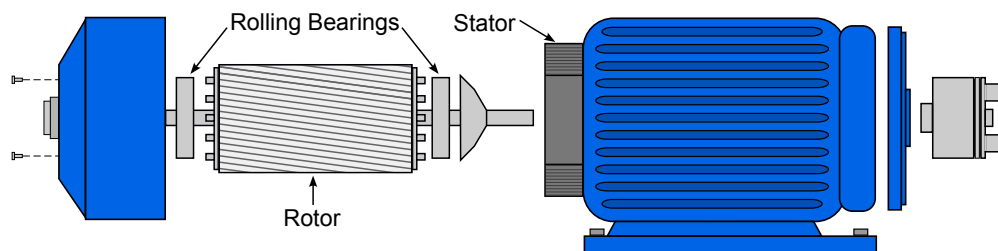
Three fundamental components of an induction motor: stator, rotor, and rolling bearings.
